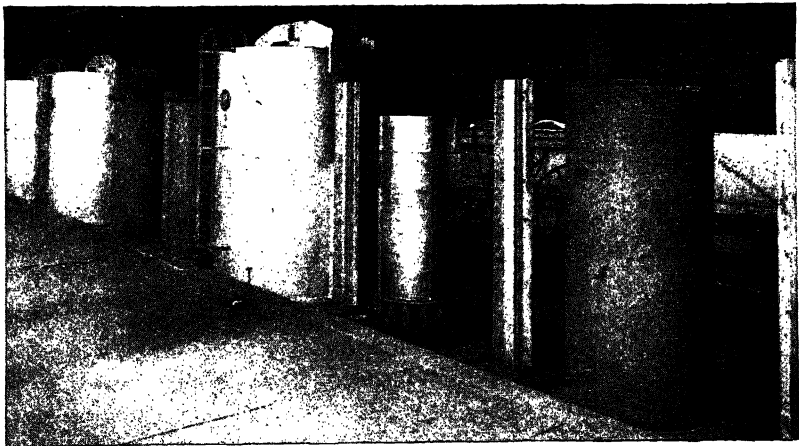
Battery of cylindrical bell type, electrically heated, furnaces for coiled strip.
